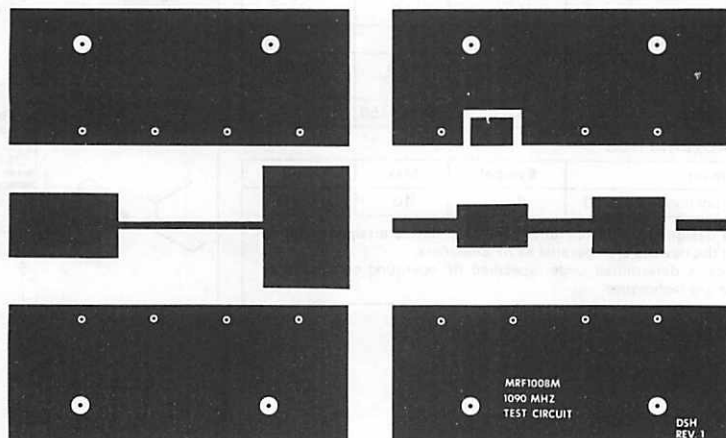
PRINTED CIRCUIT BOARD LAYOUT—1090 MHz TEST CIRCUIT
